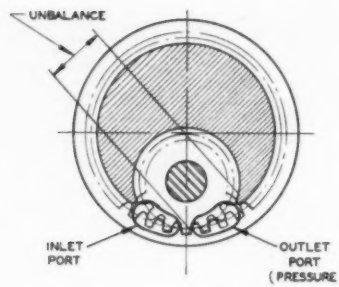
UNBALANCED INTERNAL-GEAR PUMP
